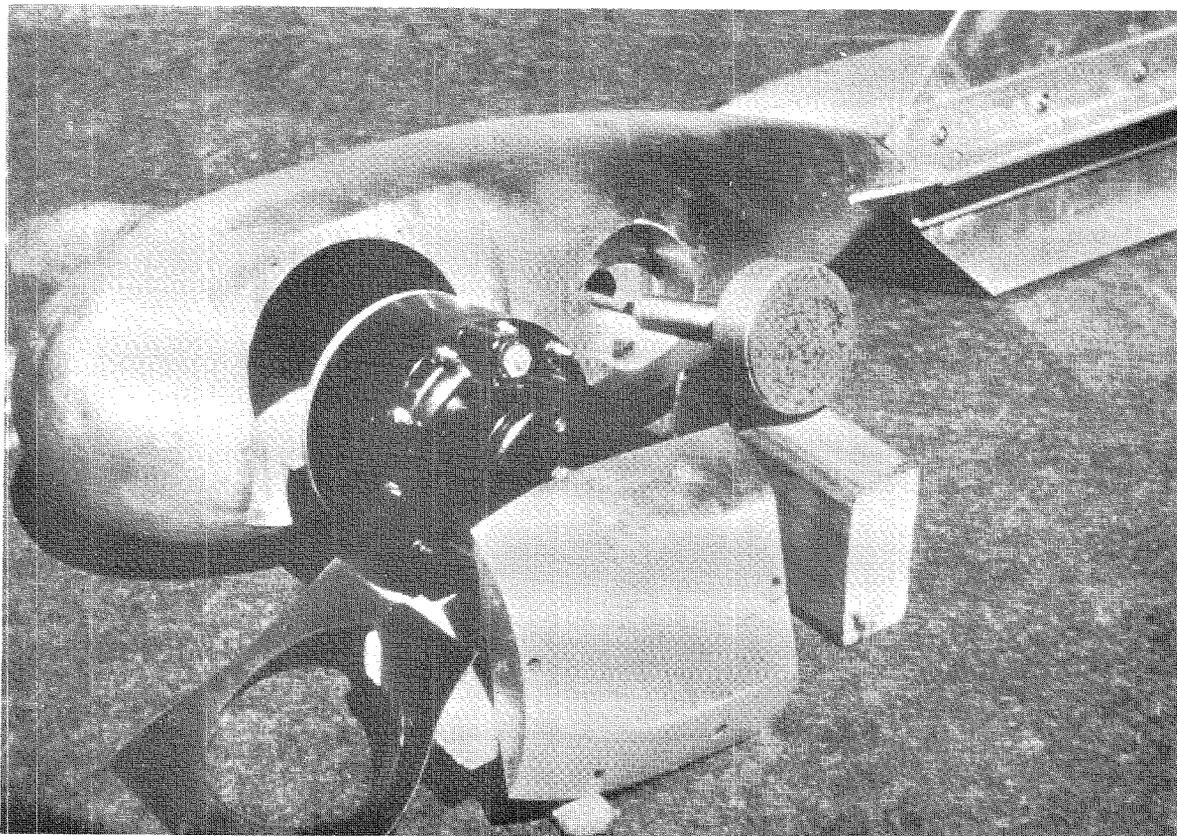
Sounding weight with compass and sonic transducer ready for assembly.
